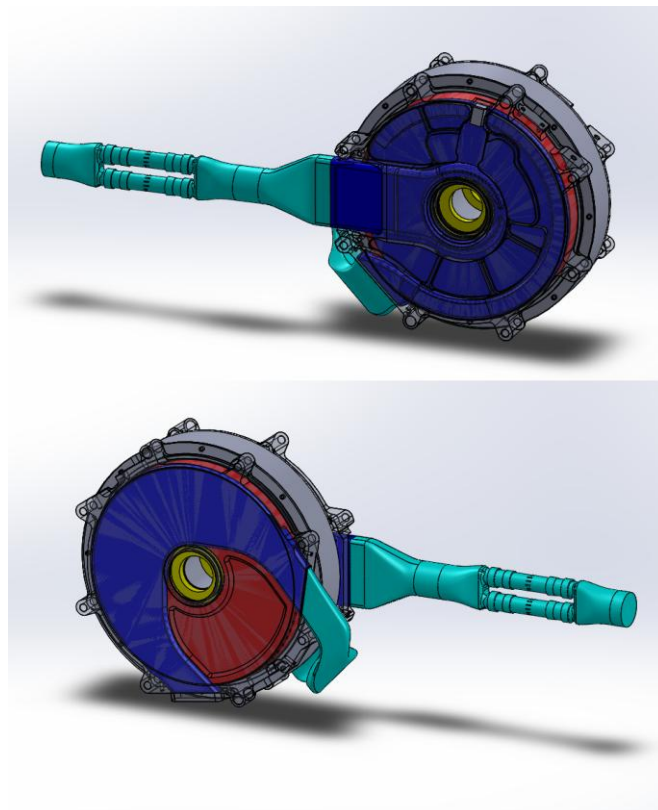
The YASA machine assembly integrated with Design 2 and Design 3 inlet and outlet arrangement including dual mass flow sensors on the inlet.
